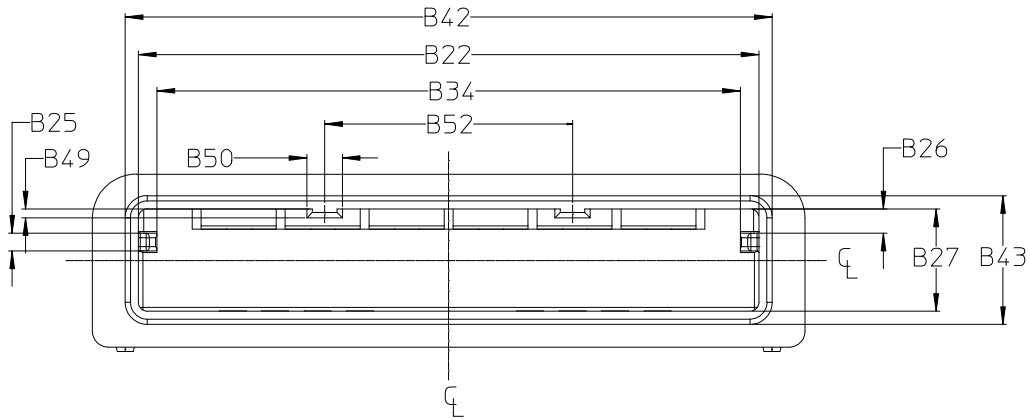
x8 EMI Guide Housing Assembly Face View
